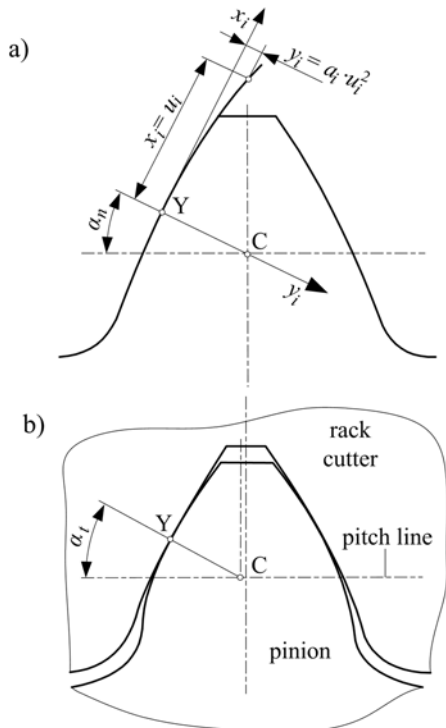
New version of the W-N gear; a) rack-cutter in normal section, and b) transverse profiles; adapted from [59]
